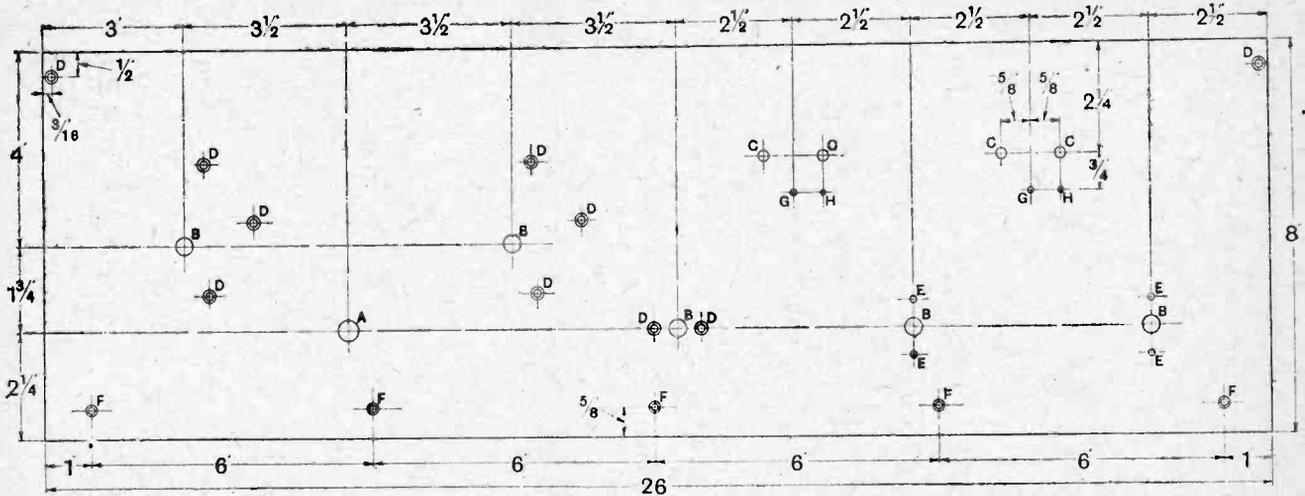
The front ebonite panel. Details of securing and clearing holes. A, 7/16in.; B, 3/8in.; C, 7/32in.; D, 5/32in., and countersunk for No. 4 B.A.; E, 5/32in.; F, 1/8in., and countersunk for No. 4 wood screws; G, 1/8in.; H, 3/32in., 3/16in. deep, tapped 6 B.A.
